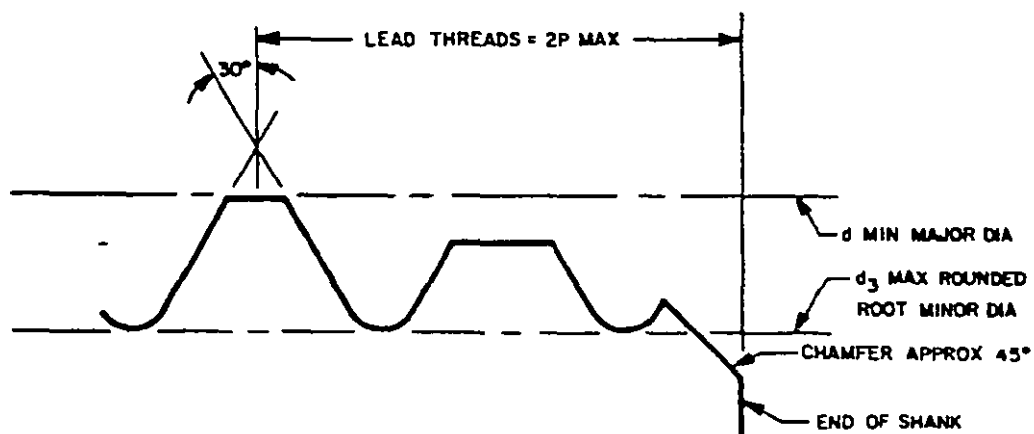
INCOMPLETE FORMED EXTERNAL THREADS, LEAD-IN THREADS
